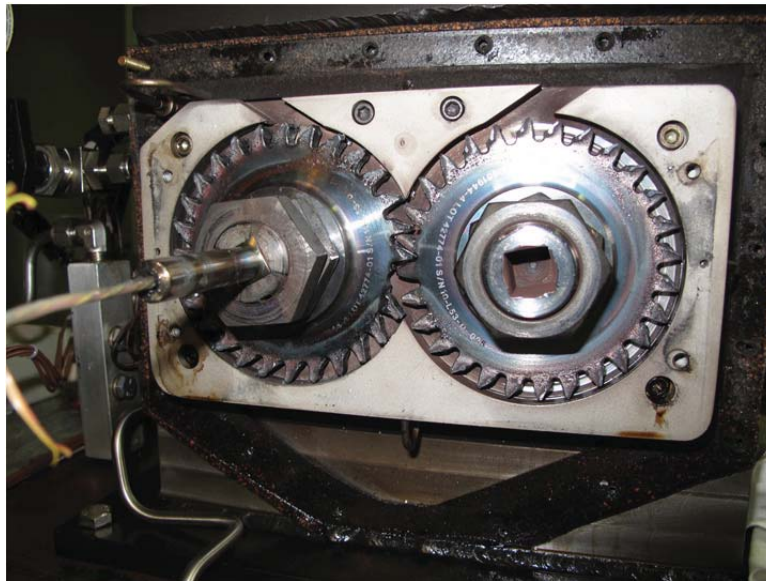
Post-test condition after loss-of-lubrication test was completed. Gearbox housing, slip ring and outer high temperature glass removed.
